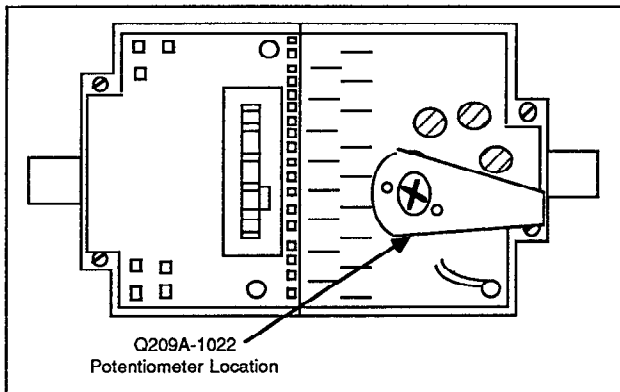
Motor Mounted Potentiometer (Q209A-1022) Location
